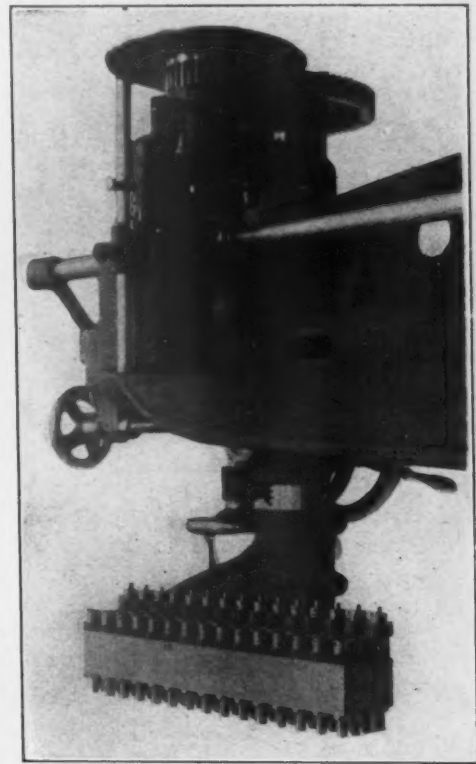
MULTIPLE DRILLING DEVICE.—MUELLER MACHINE TOOL CO.
